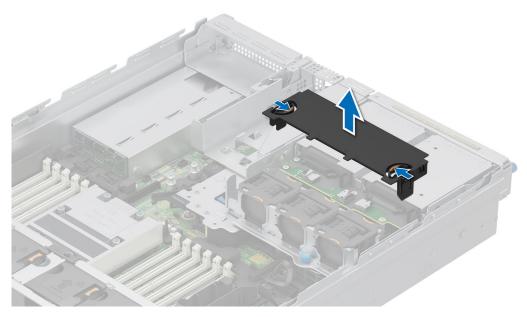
Removing the 4 x 2.5-inch rear drive module air shroud
